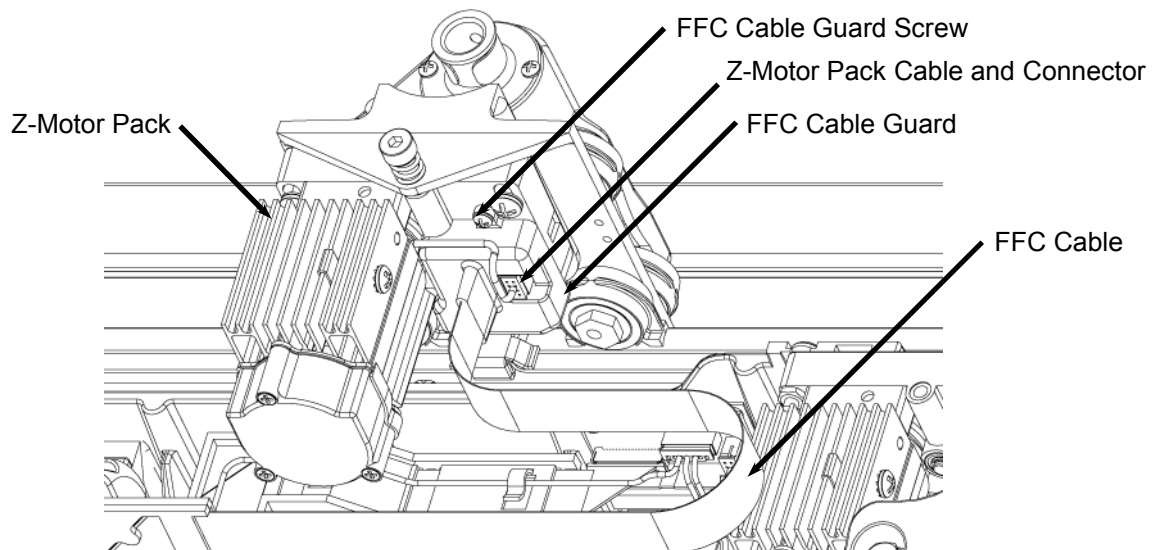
VIEW OF THE BACK OF THE Z-MOTOR PACK
